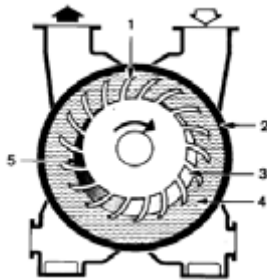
Liquid piston rotary compressor, 1) impeller, 2) housing, 3) intake port, 4) working liquid, and 5) discharge port [1].
